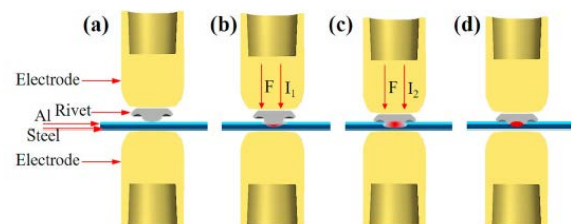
Sketch of the integrated REW process: (a) prepressing stage, (b) thermal piercing stage, (c) welding stage and (d) retreating stage.
